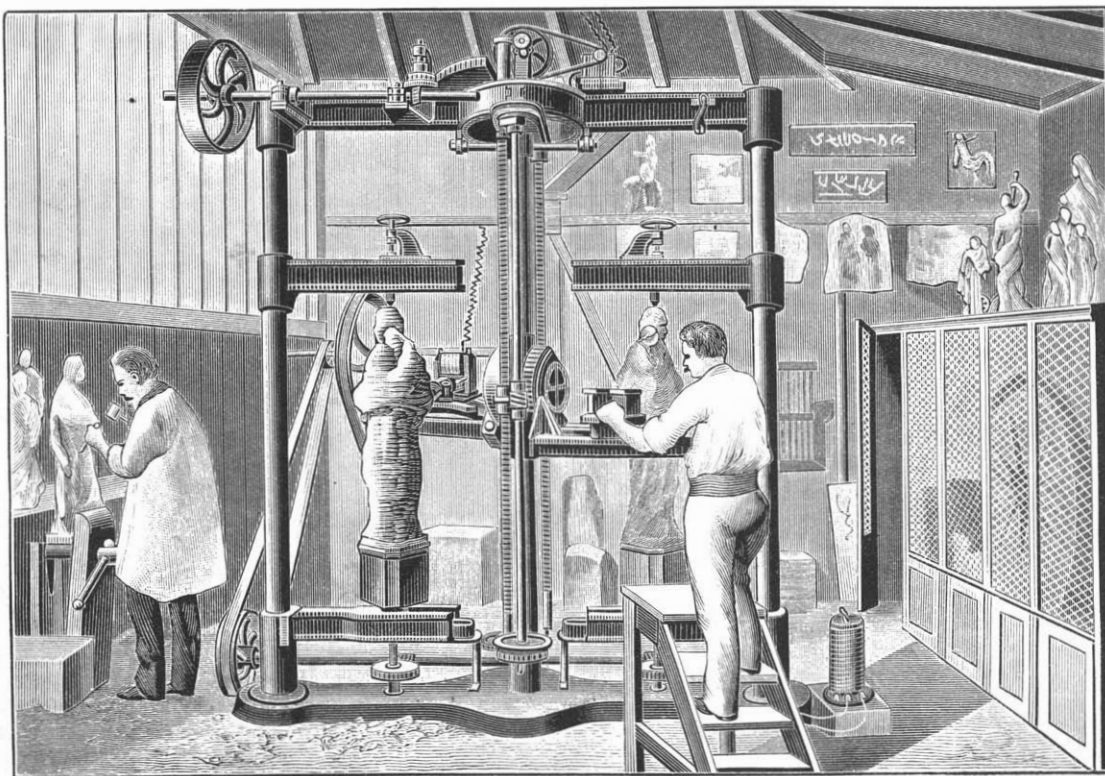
AUTOMATIC SCULPTURING MACHINE.
